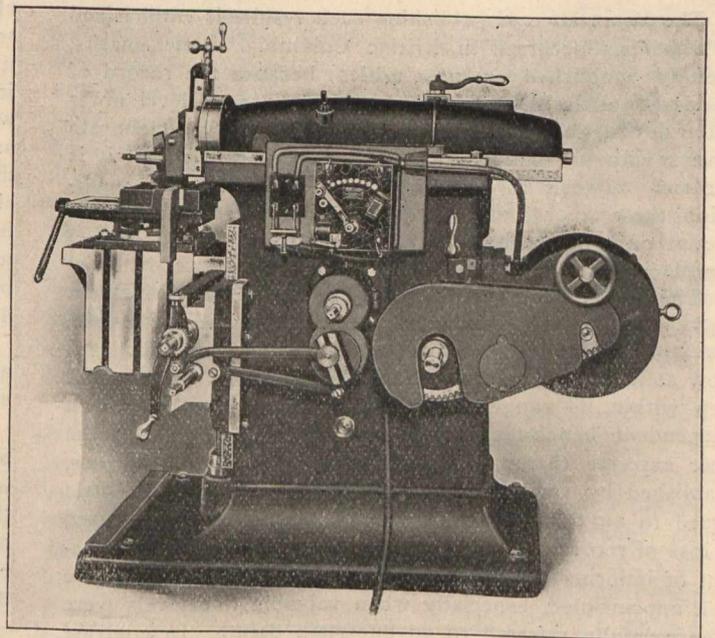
Two H.P. 5 to 1 Motor, Mounted on 16" Shaper.
